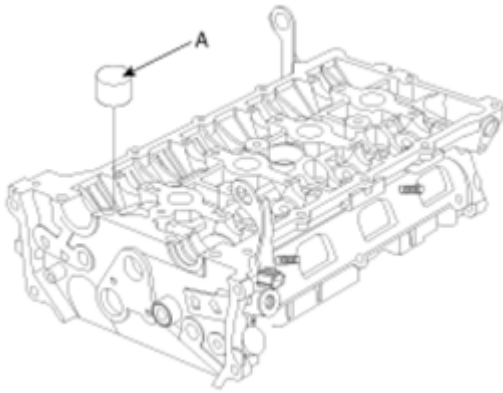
Identifying MLAs (Mechanical Lash Adjuster)
